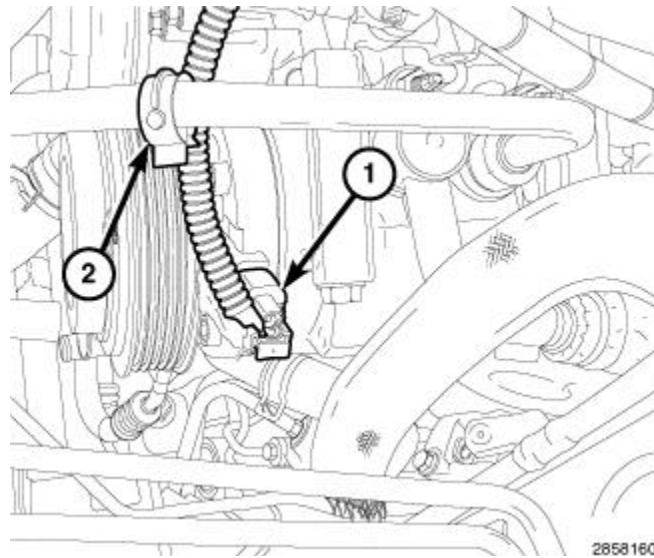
A/C Compressor Electrical Connector & Wire Harness Retainer
